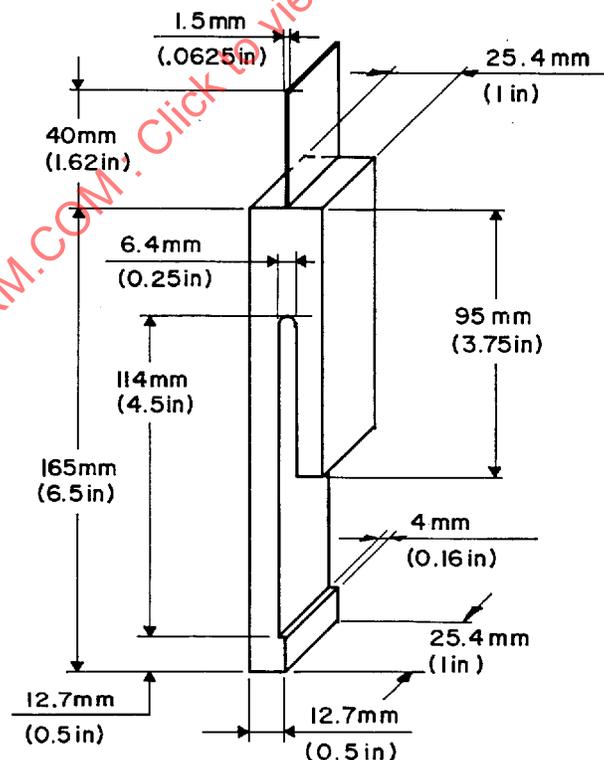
FIXTURE USED FOR TESTING OVERLAP SHEAR TEST SPECIMEN
